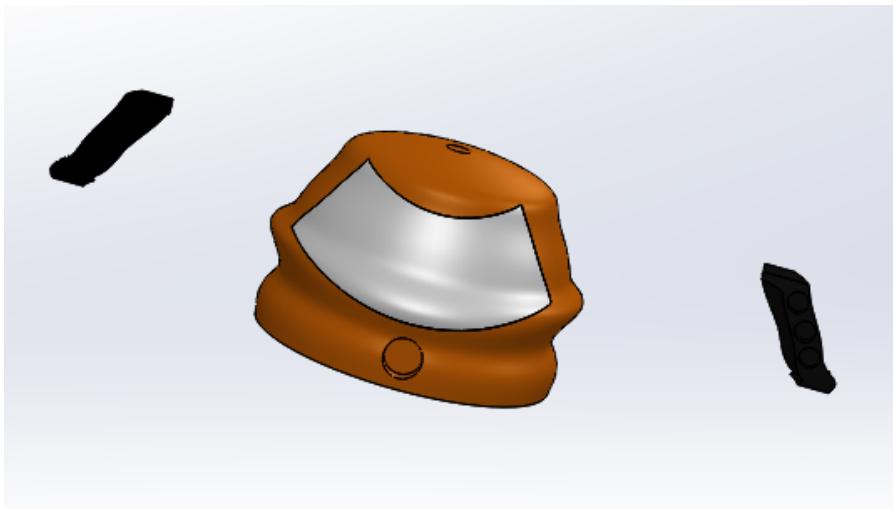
Ferrarer, Auston: Assembly Step 2
